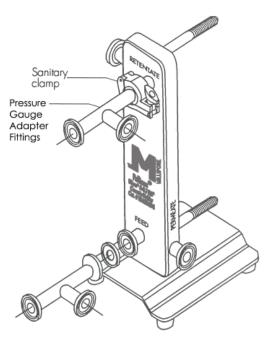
Clamping the Pressure Gauge Adapter Fittings to the Mini Holder Fitting
